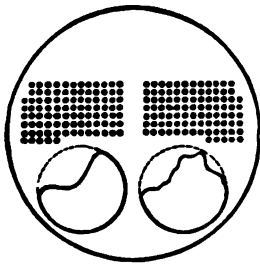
Explosion of marine return-tube boiler from collapse of the furnace-tubes.
